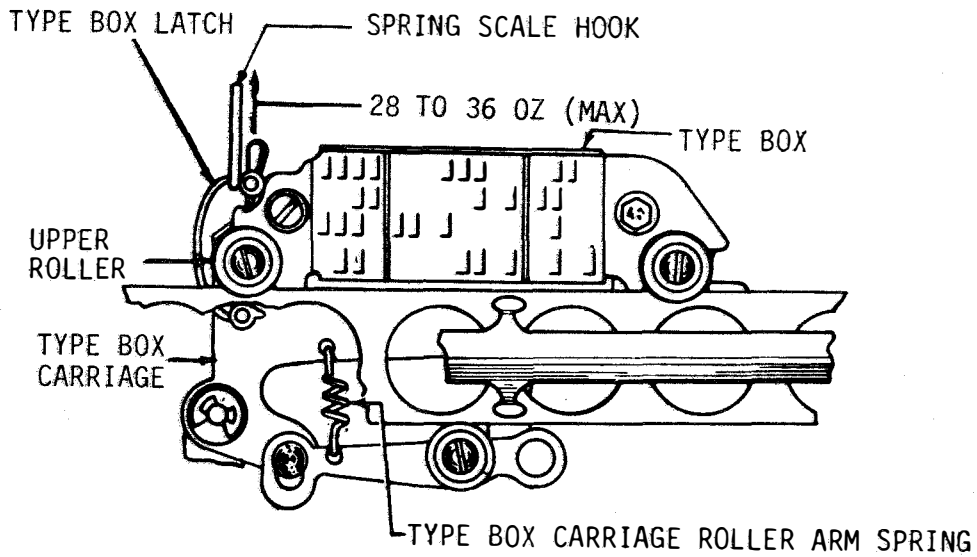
Type Box Carriage Roller Arm Spring, Front View
